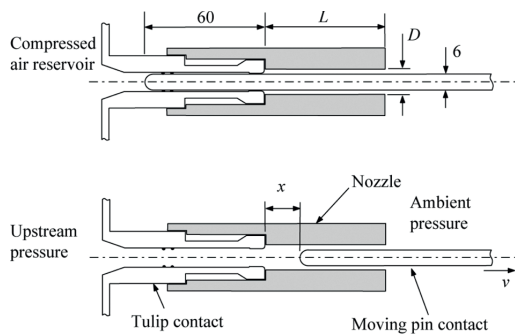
Axisymmetric contact and nozzle geometries in closed position (upper drawing) and shortly after opening (lower drawing). L and D are the length and inner diameter of the nozzle, respectively. The contact position is x . Dimensions are in millimeters.
